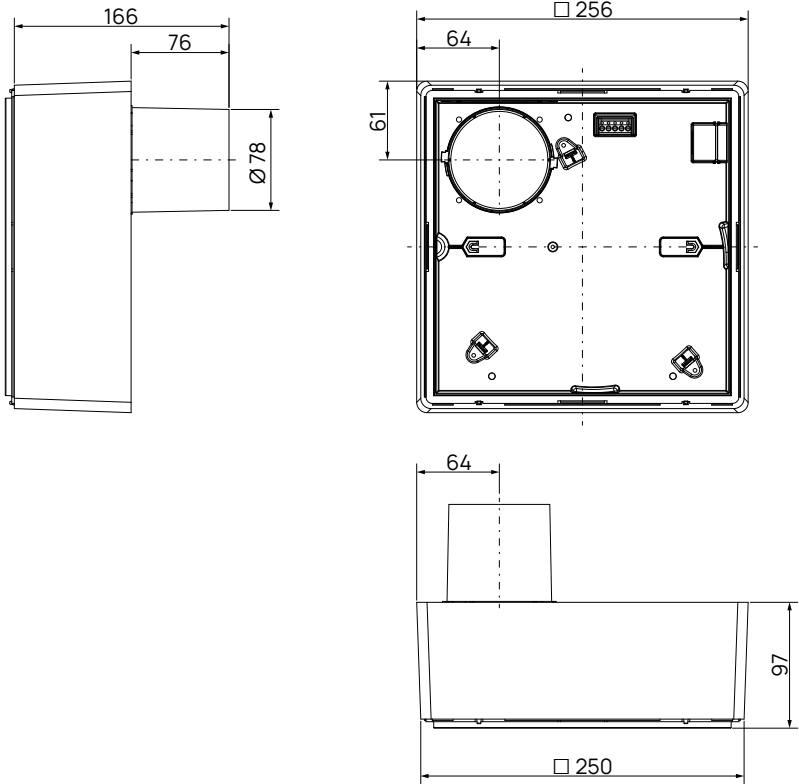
Dimensioned drawing – surface-mounted Taris extractor fan housing
